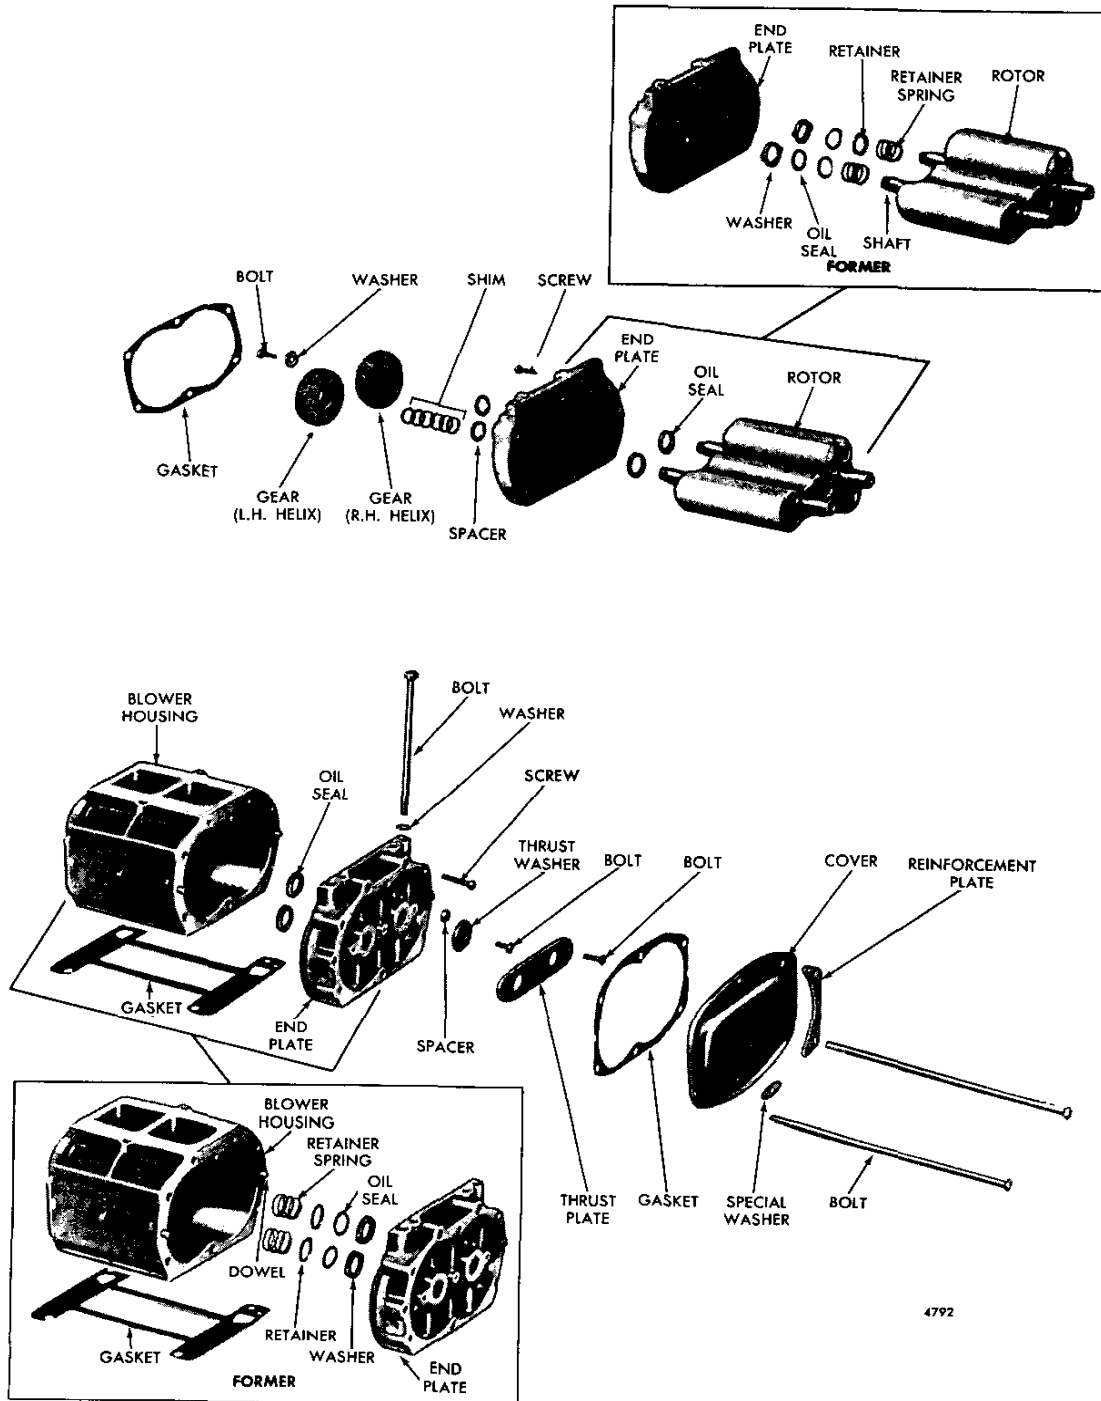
Typical Blower Details and Relative Location of Parts (3-53 Engine Blower)
